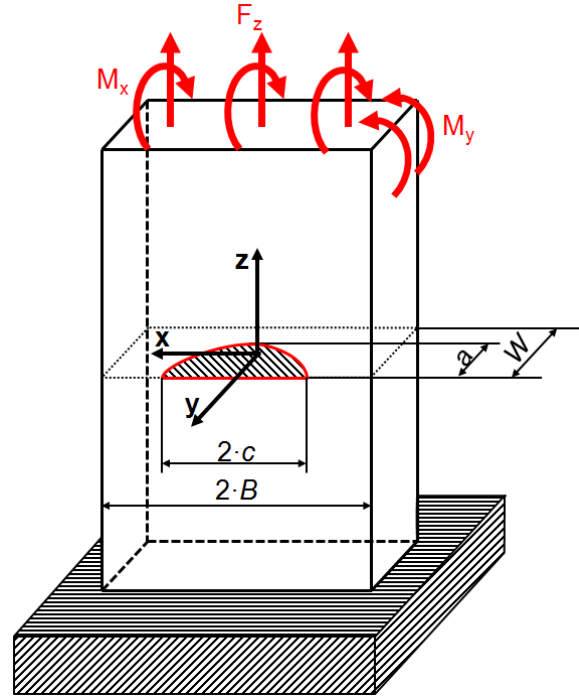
Dimensions of the specimen and the semi-elliptical surface crack.
